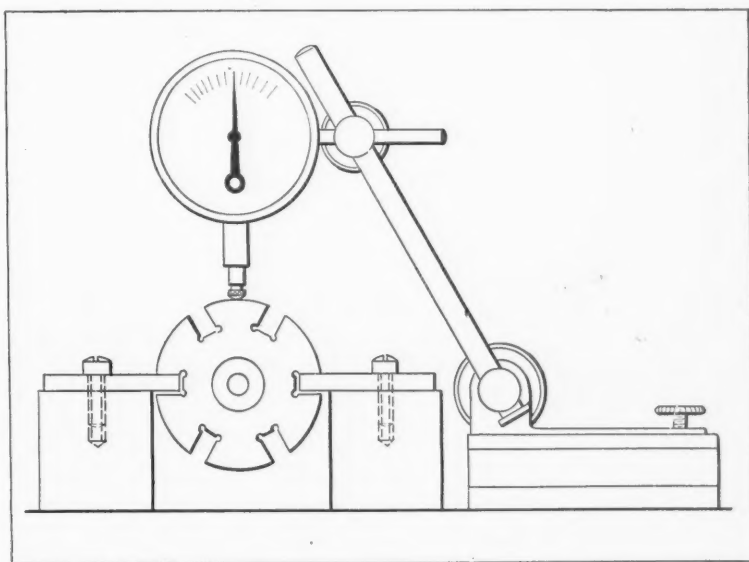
A Rapid and Accurate Method of Checking the Finished Spline Gage
